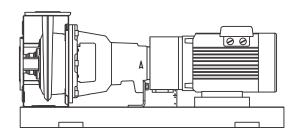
Schematic view of SNK pump-motor unit mounted on a base frame
